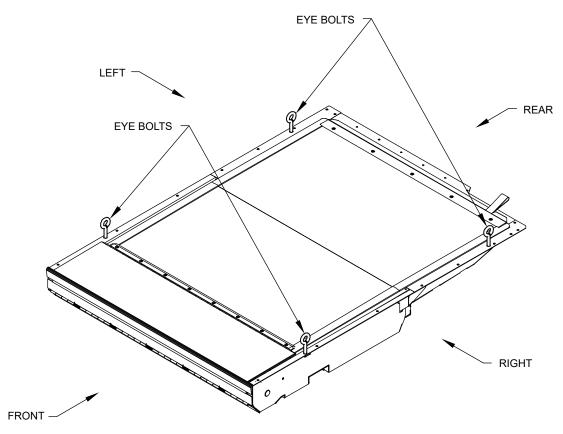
RAMP LIFTING EYE BOLTS
